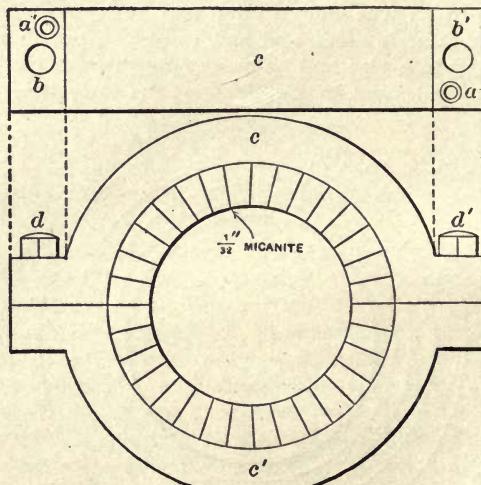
Segments of Commutator Held in a Clamp for Machining Hole and Ends
